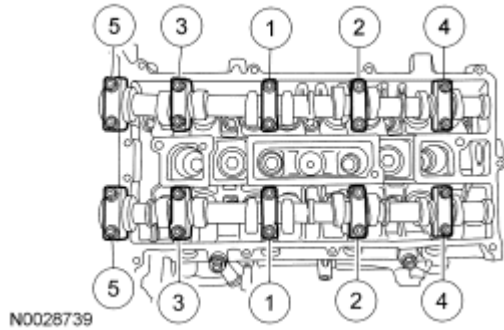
Identifying Tightening Sequence Of Cylinder Head Bolts
